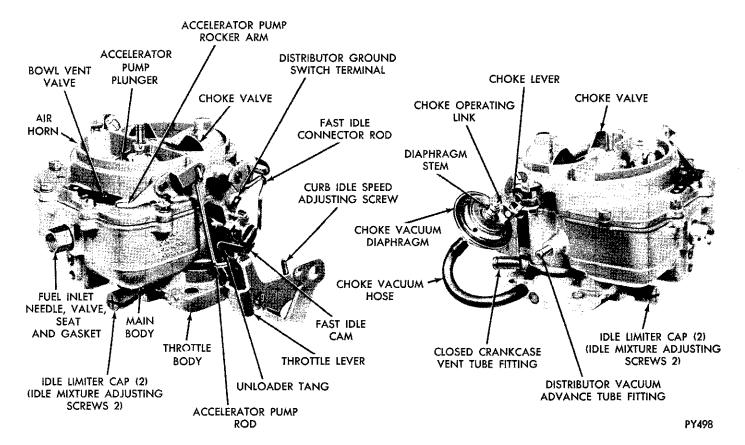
Carburetor Assembly (BBD-1-1/2 inch) C.A.S.
